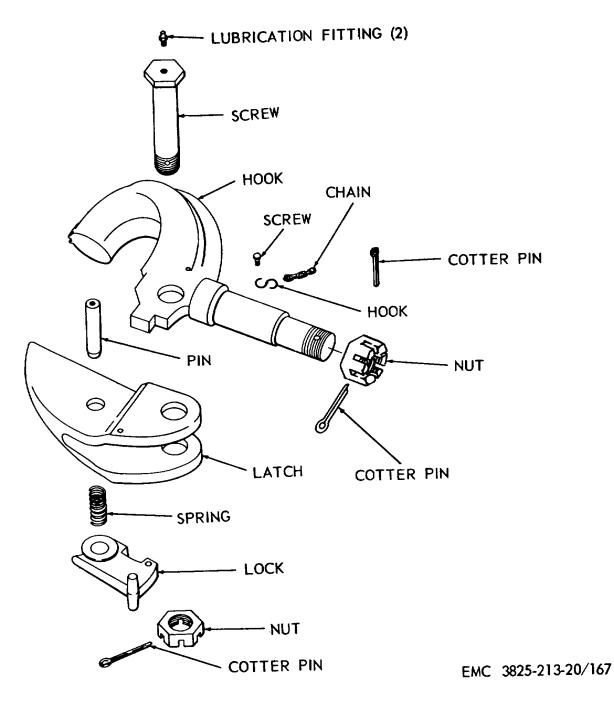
Pintle hook, disassembly and reassembly, exploded view.
